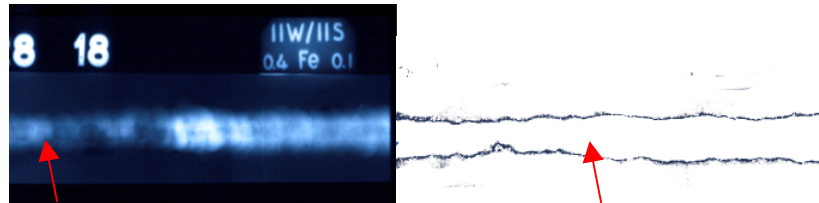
Radiography film image and weld edge cluster in the case of undercut
